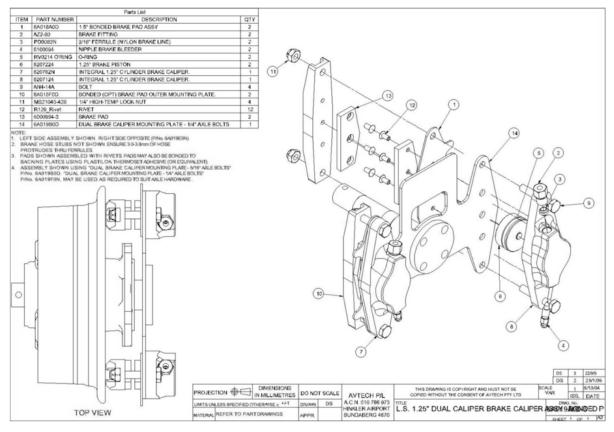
Dual Calliper Brake Assy (Quick Change Pads) (J200/J400, J230/J430, J250,J450)
